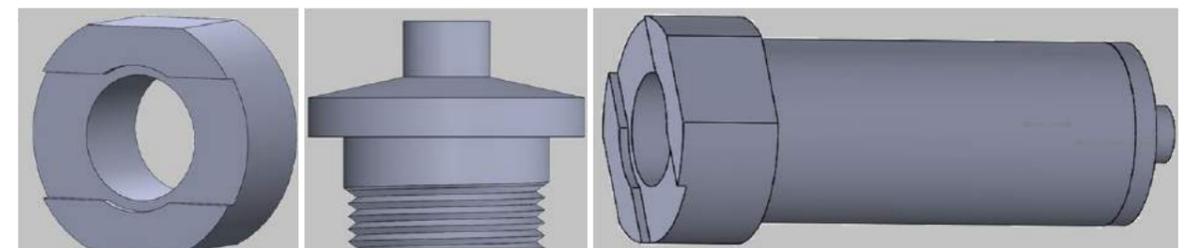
Heating extruder: (a) flange (b) nozzle (c) extruder assembly [3]
